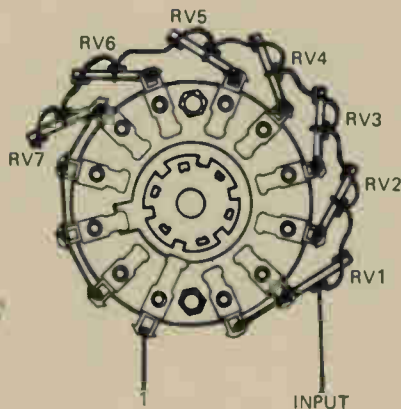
Method of wiring up oscillator switch SW1 bottom wafer.
